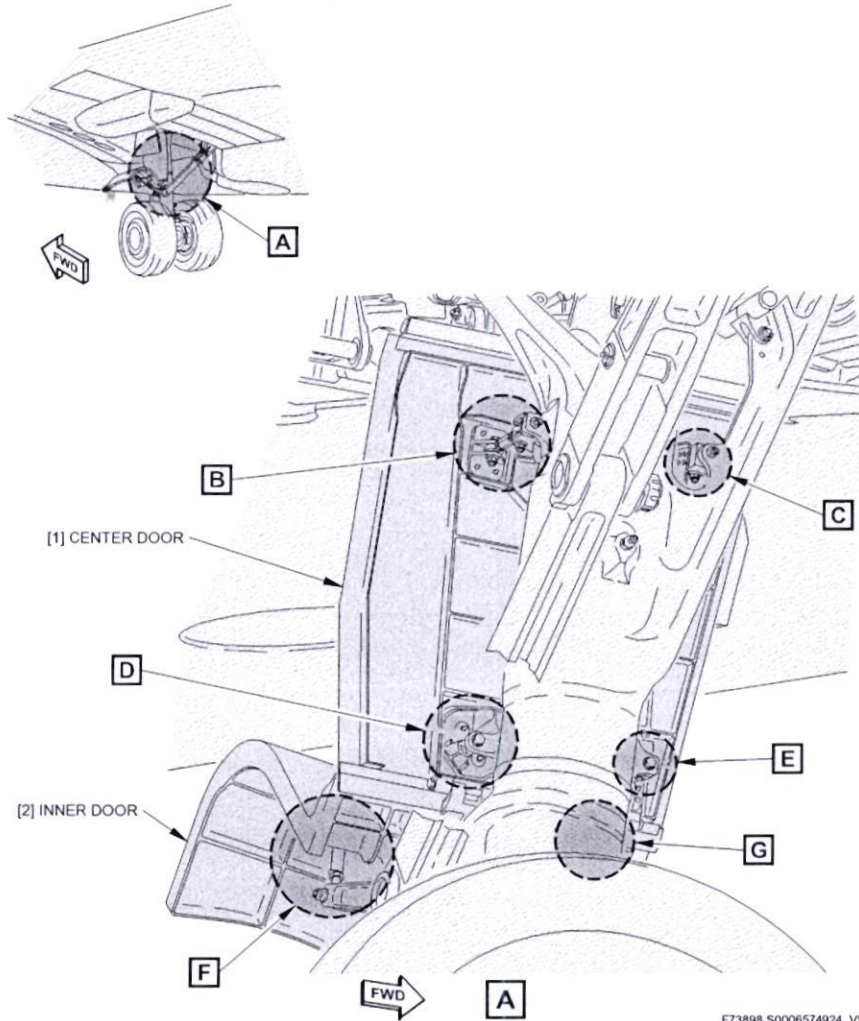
MLG Aft Trunnion Bearing Assembly Installation - Sheet 3
